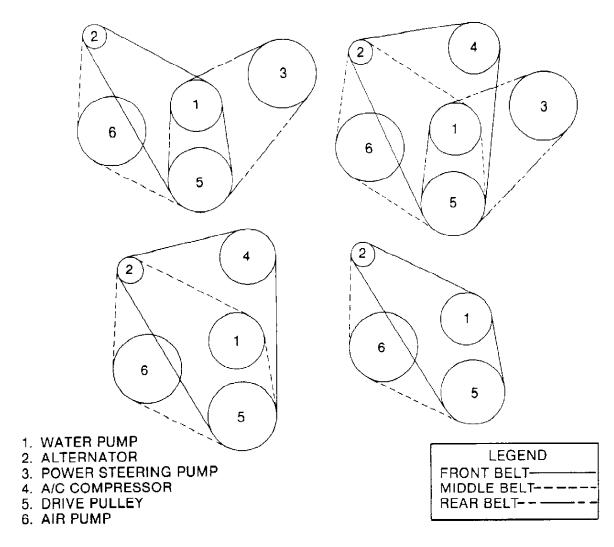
Drive Belt Arrangement: 1983-86 4.2L Comanche & Wagoneer Courtesy of Chrysler Motors
